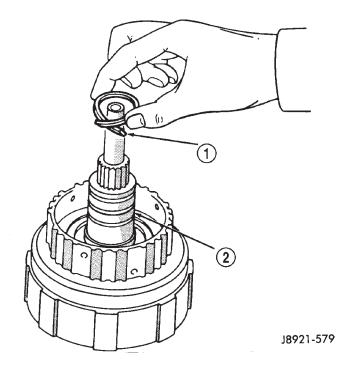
Installing Clutch Drum Shaft Seal Rings
